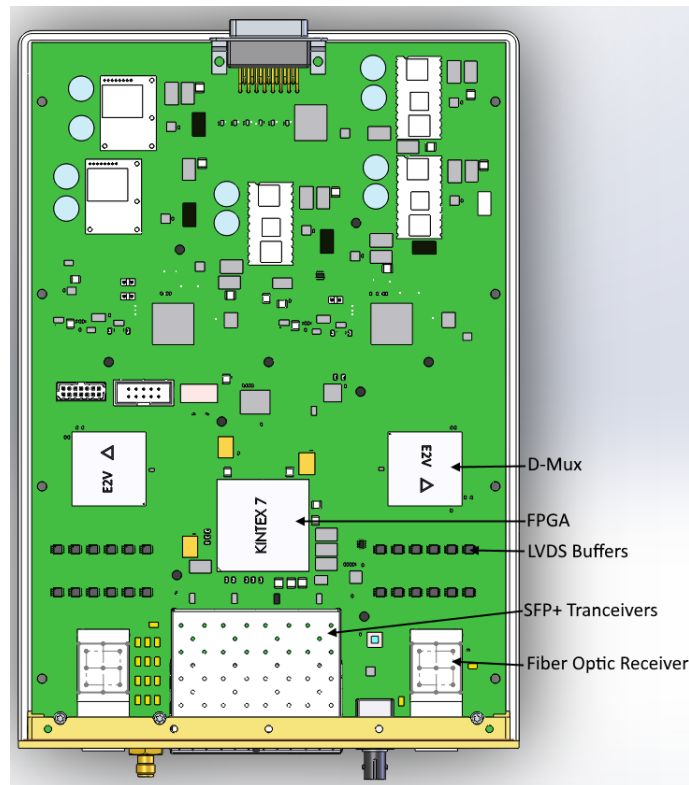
Symmetrical layout of the D-Engine PCB design.
